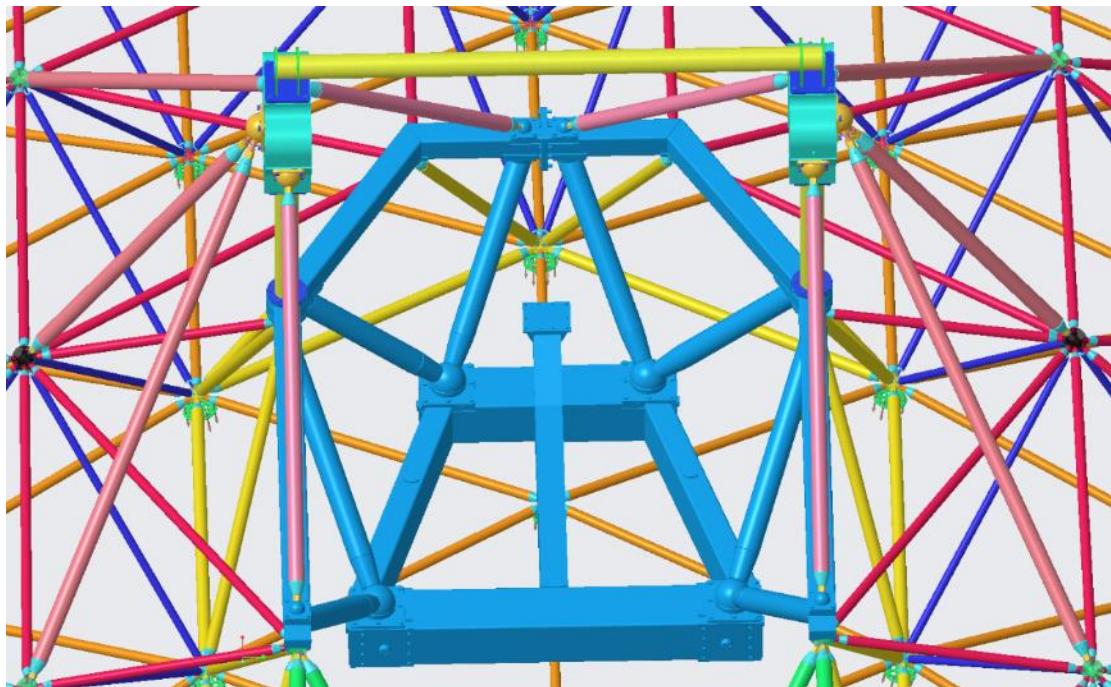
Connection between the Elevation-Turnhead Frame and the Backup Structure
